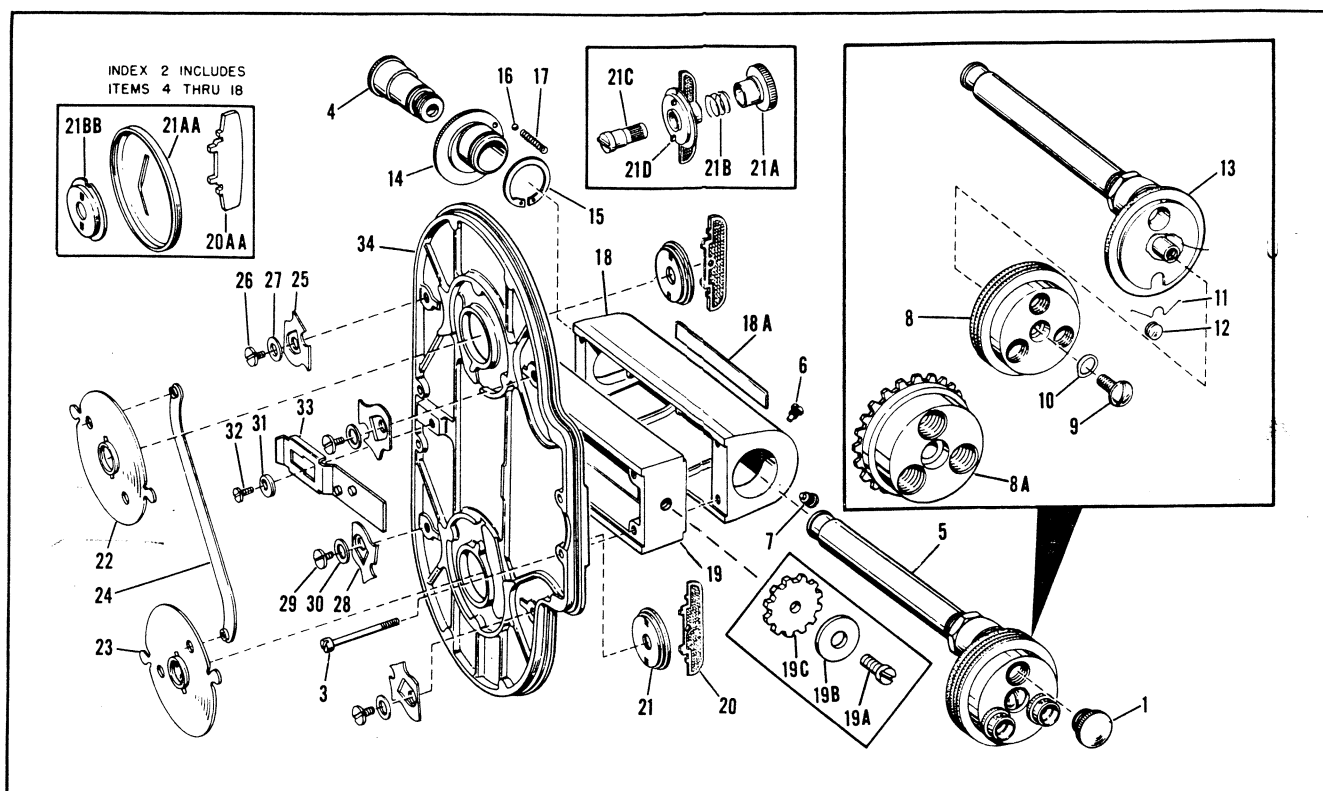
Camera Cover Assembly - Design 70DL, 70H, 70DR and 70HR Cameras
